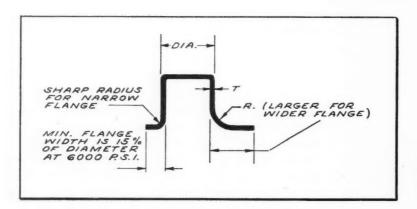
Small residual flanges permit sharp forming radii, while large flanges require larger radii. At 6000 pounds per square inch forming pressure, the minimum flange width is 15 per cent of the cup diameter
